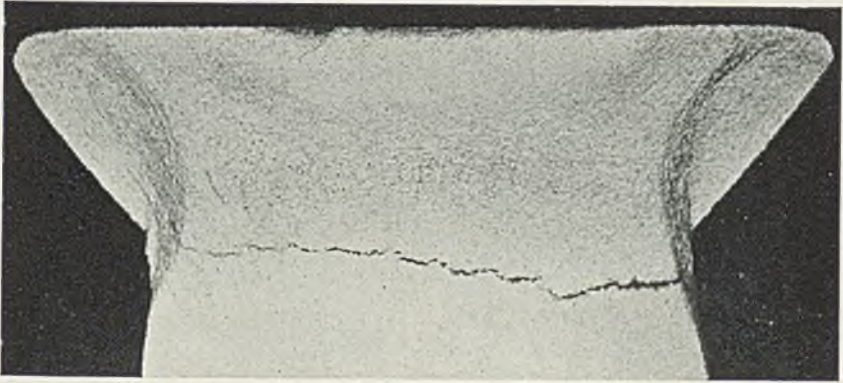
7% Magnesium Alloy Rivet Head, showing stress-corrosion crack.
